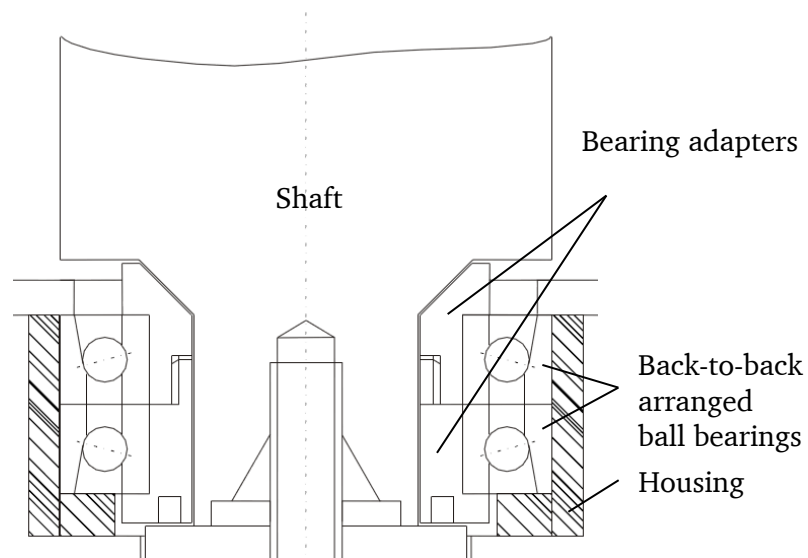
Adapter design for the safety bearing (bottom) to ensure a centered flywheel rotor
